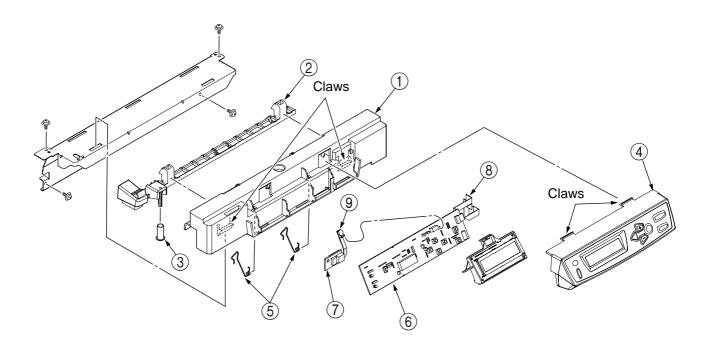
Board RSP / Environment Sensor / Top Cover Handle
